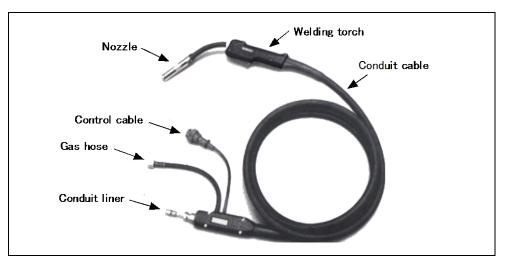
A conduit liner should be taken out periodically from the conduit cable, and check its appearance to ensure good wire feedability
